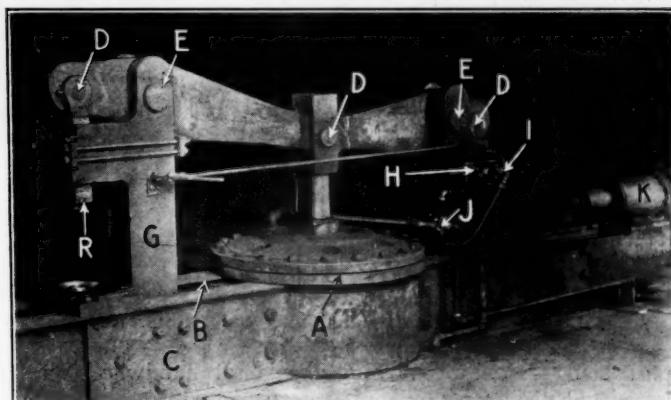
Pneumatic Riveting and Shearing Machine for Coupler Yokes
